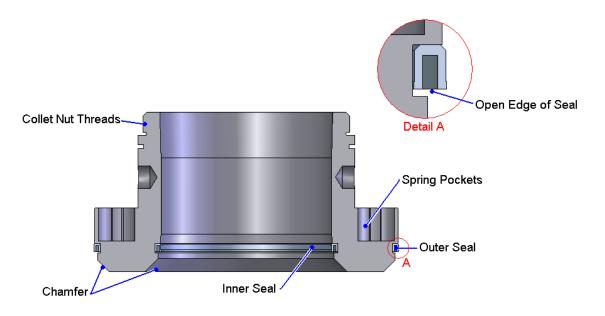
Cross-section View of Piston Showing Seal Orientation
